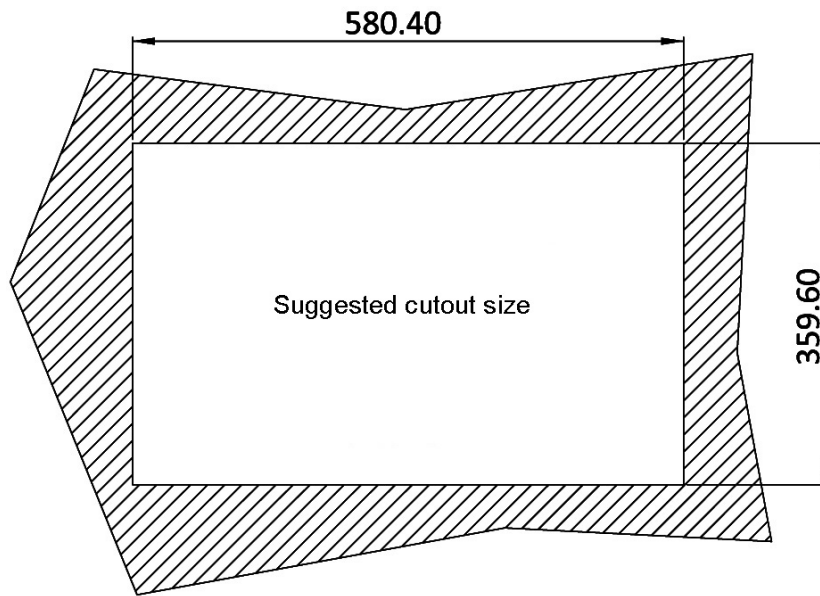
PPC-F24A-H81 Panel Cutout Dimensions
